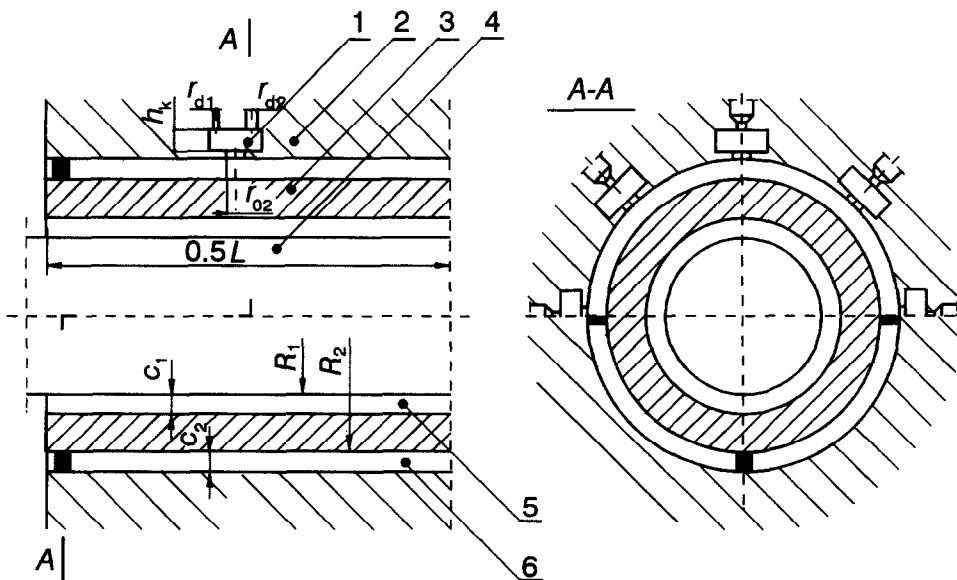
Air ring: a design of an elastic support of a bearing bush (1: chamber, 2: casing, 3: bush, 4: rotor, 5: bearing gap, 6: air ring).
